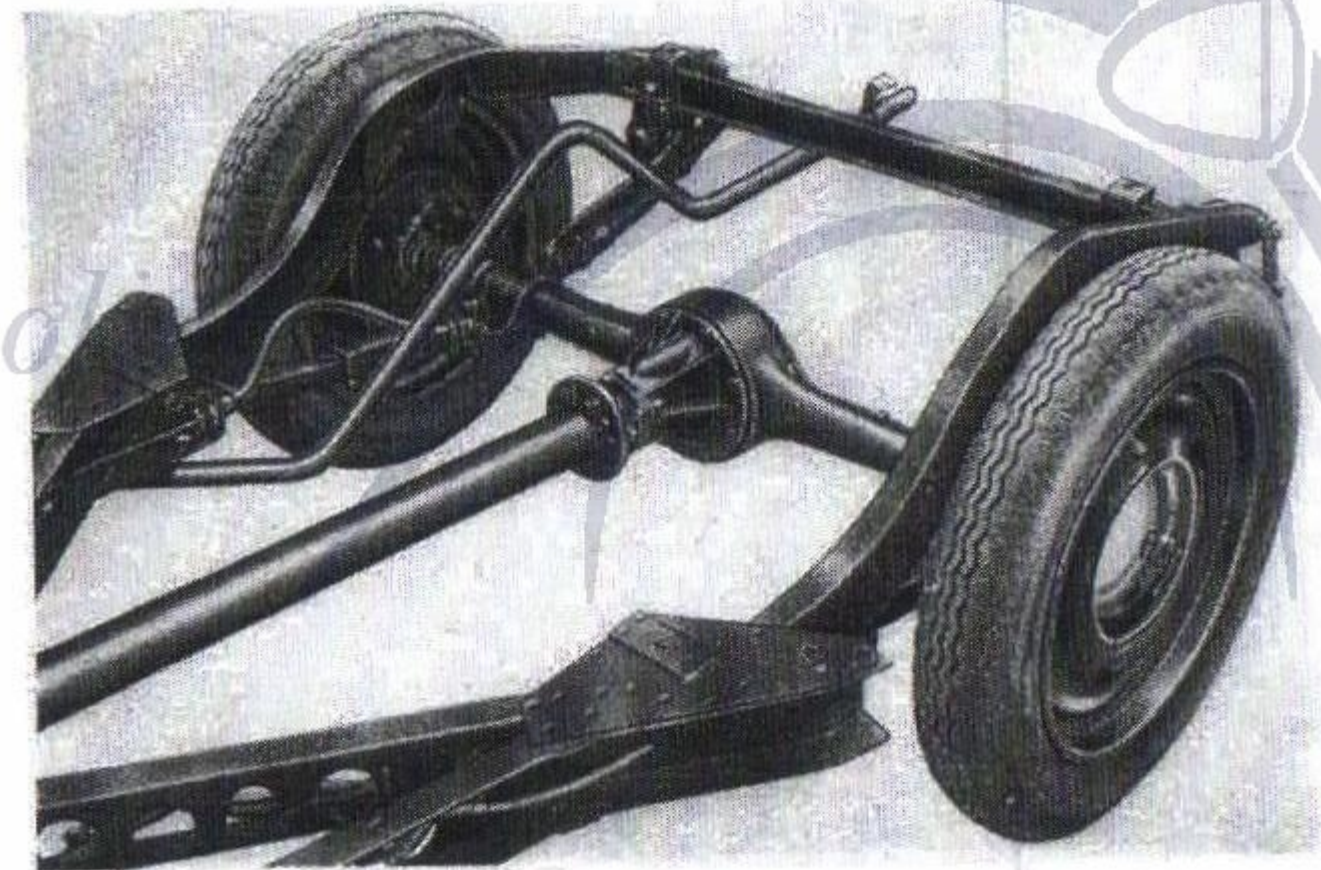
Details of the rear portion of the chassis (starting from chassis No. 046001).
